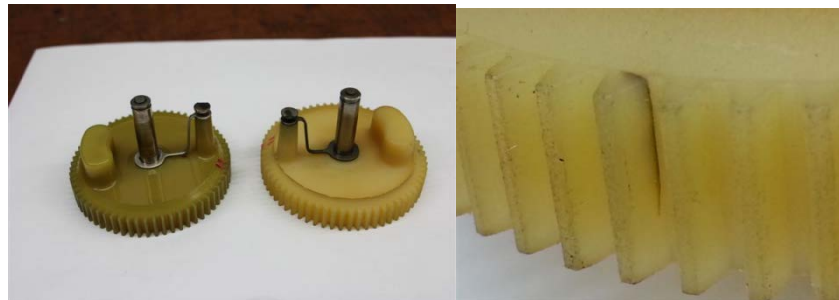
Original gear compared to sandblasted gear and cracked gear tooth
